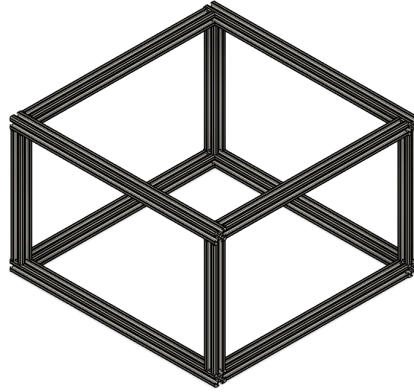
Box frame composed of 80/20 aluminum. Drawing created in Autodesk Fusion.
